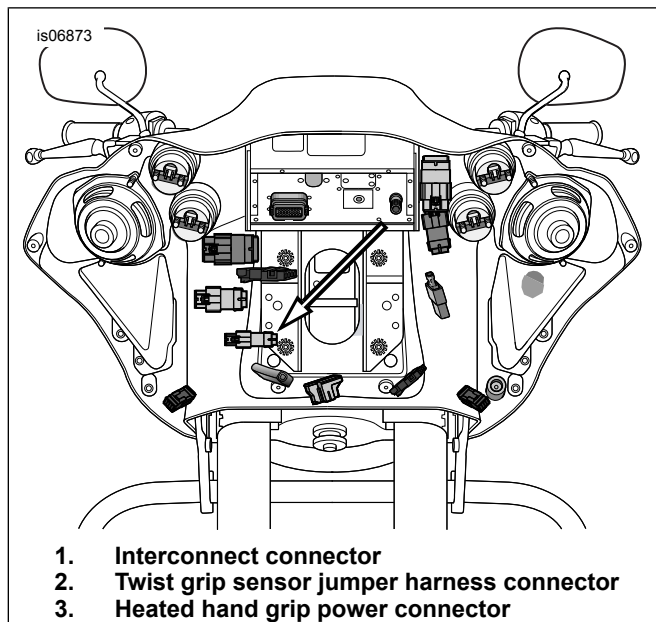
Twist Grip Sensor Jumper Harness Connector (FLTR models)
